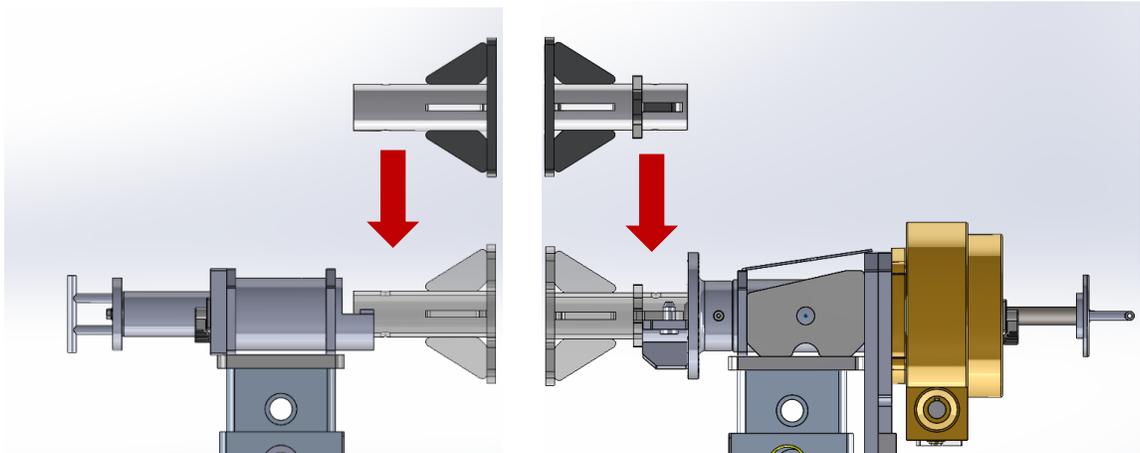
Operating Procedure for Welding Fixture Changeover, Land Welding Fixture on A-Stand Shaft
